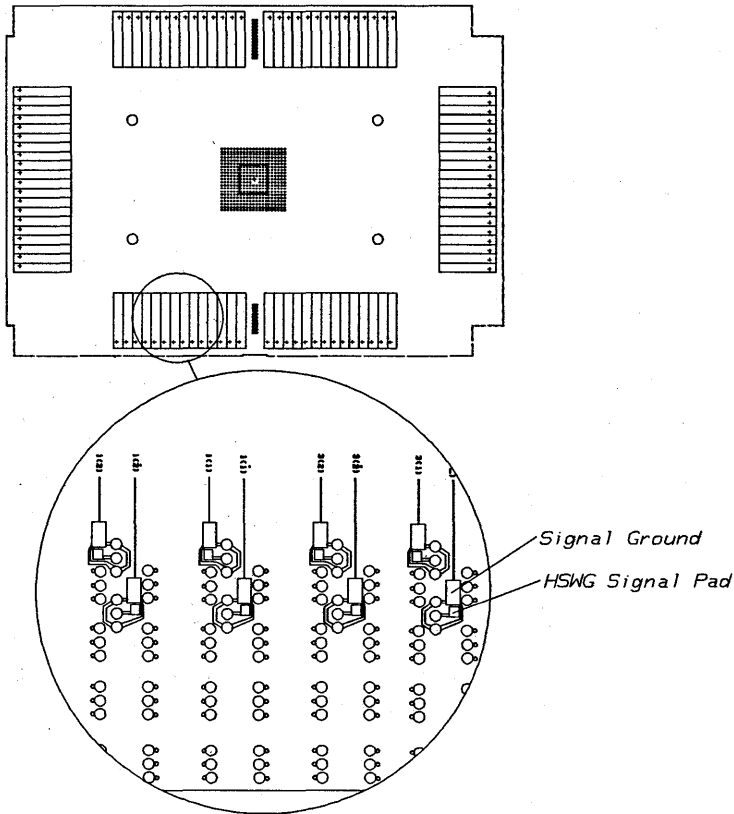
Under-side of DUT board, showing HSWG Wiring Pads
